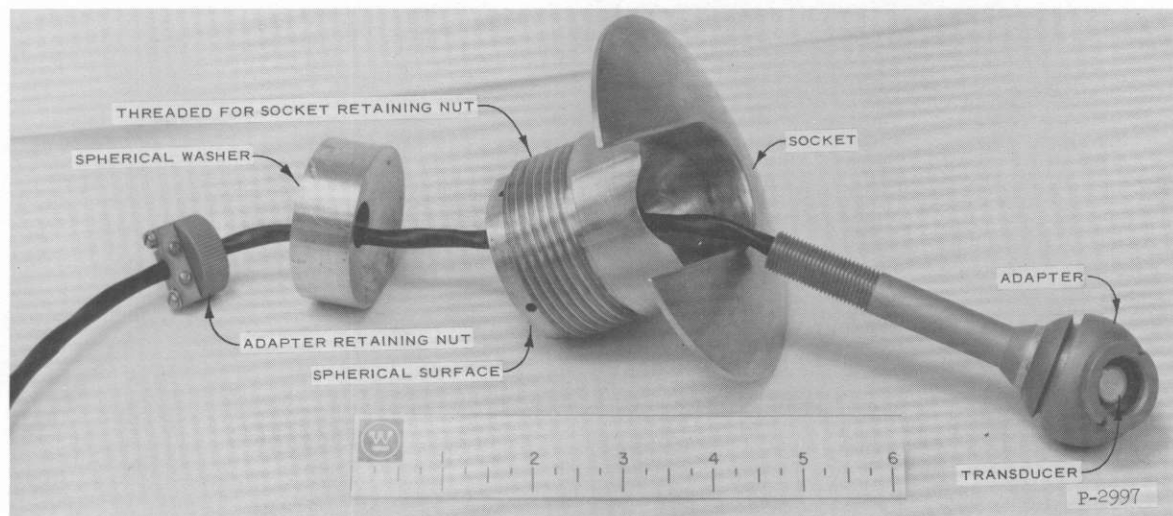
Ball-and-stem adapter and socket assembly for installing transducer in Oahe penstock (socket assembly gaskets, washers, and nuts not shown)
